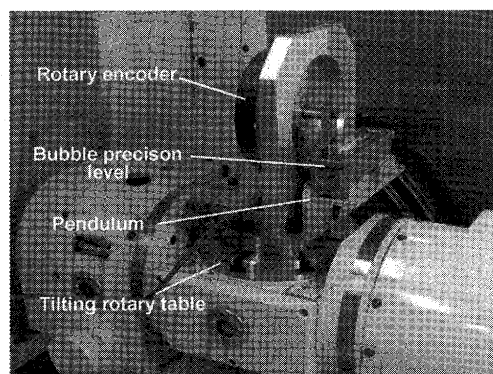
Clinometer mounted on the tilting rotary table of five-axis machining center
